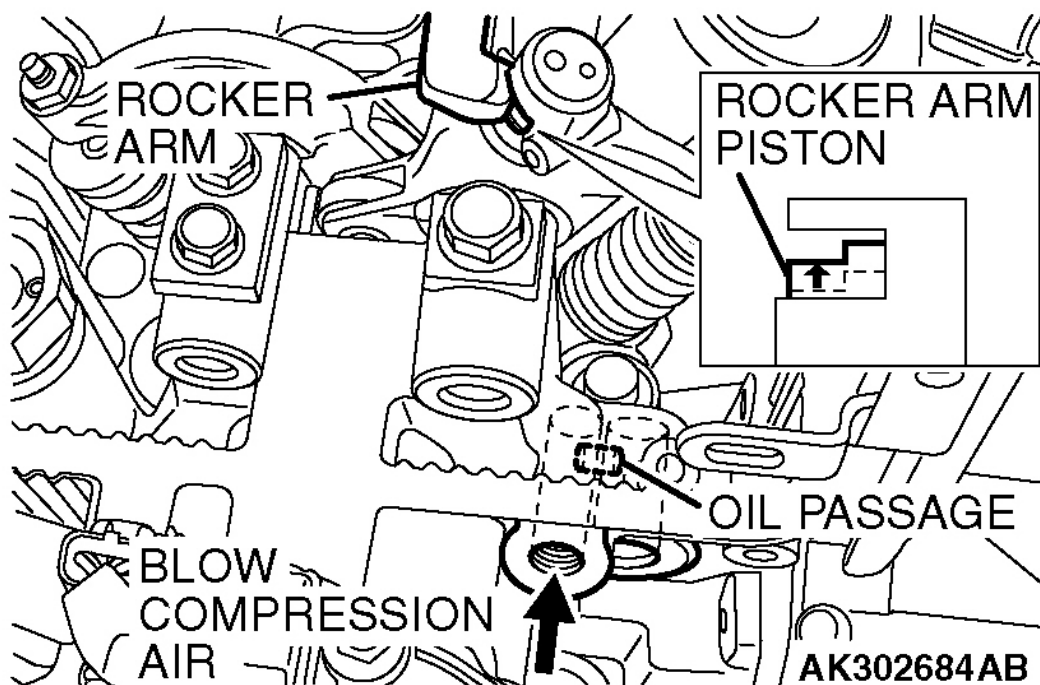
Identifying Rocker Arm Piston & Oil Passage Hole
